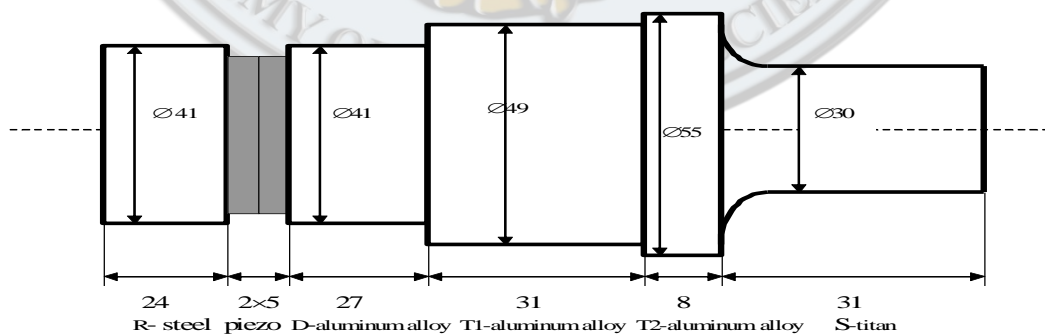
The acoustic chain realized by us for equipping the welding machine.
